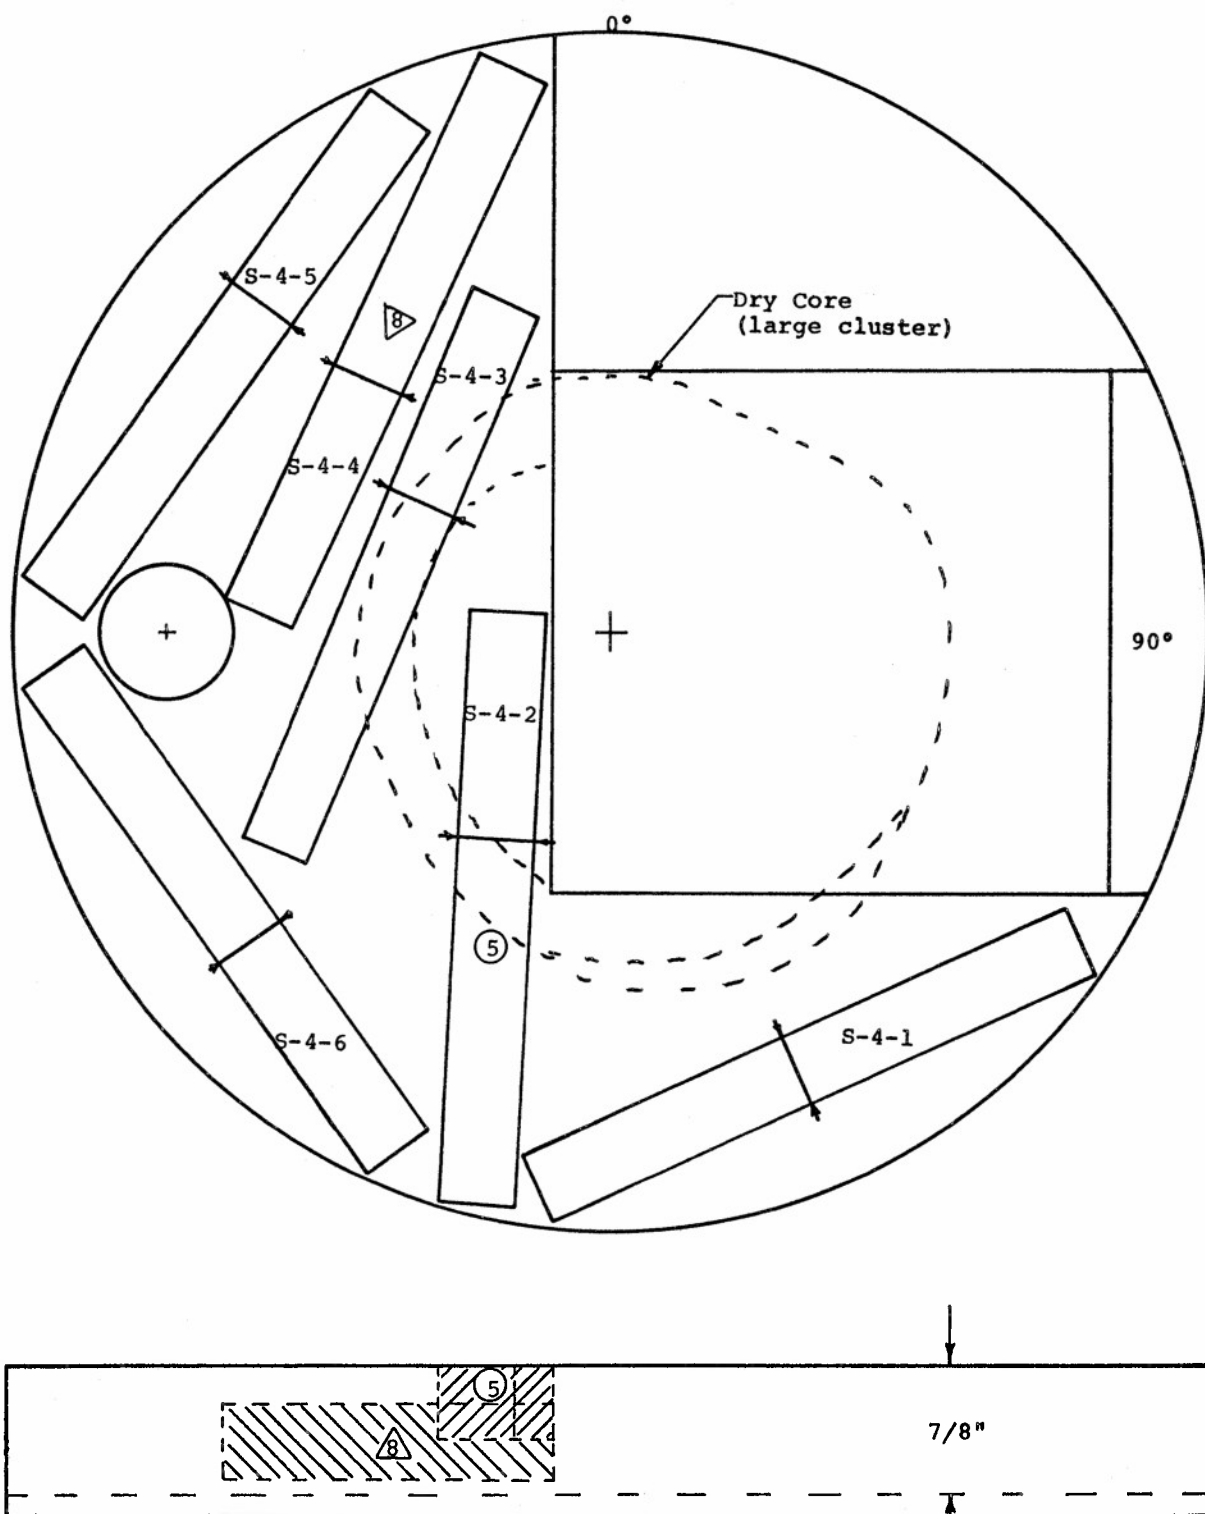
Cutting Plan Showing Results of Avco Ultrasonic Inspection of Specimen Blanks for Slab Number 4, ATJ-S Billet L-16-7
